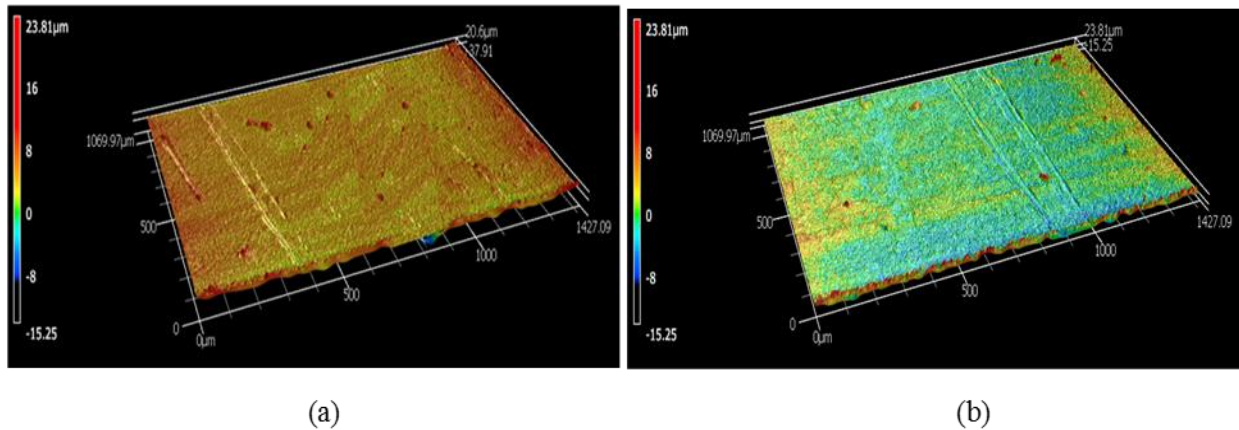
6: 3D photographs of the internal finished surface of aluminum tube (a) before and (b) after finishing process.
